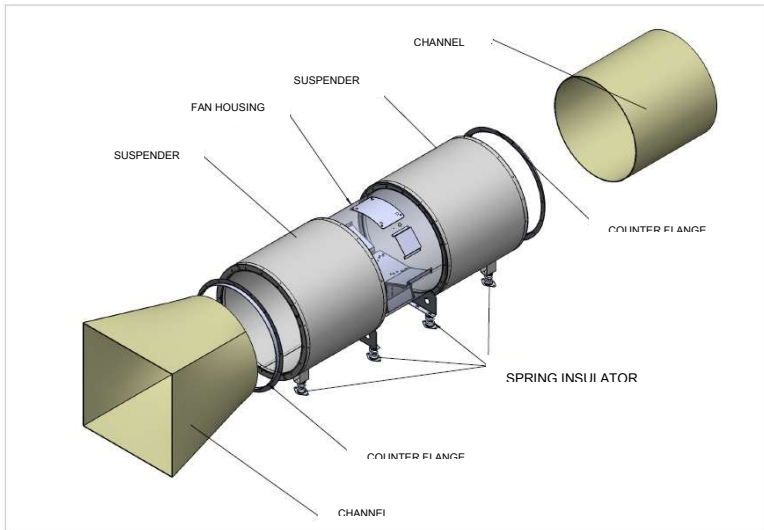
Horizontal Mounting Detail of Axial Fan and Accessories in Shaft - 1
